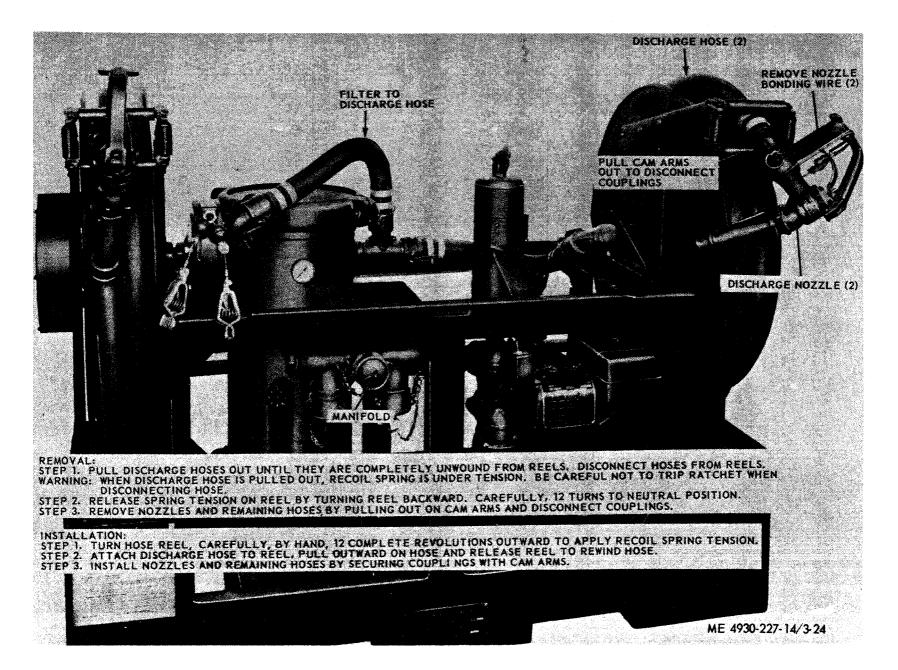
Hoses, nozzles and bonding wires, removal and installation.
